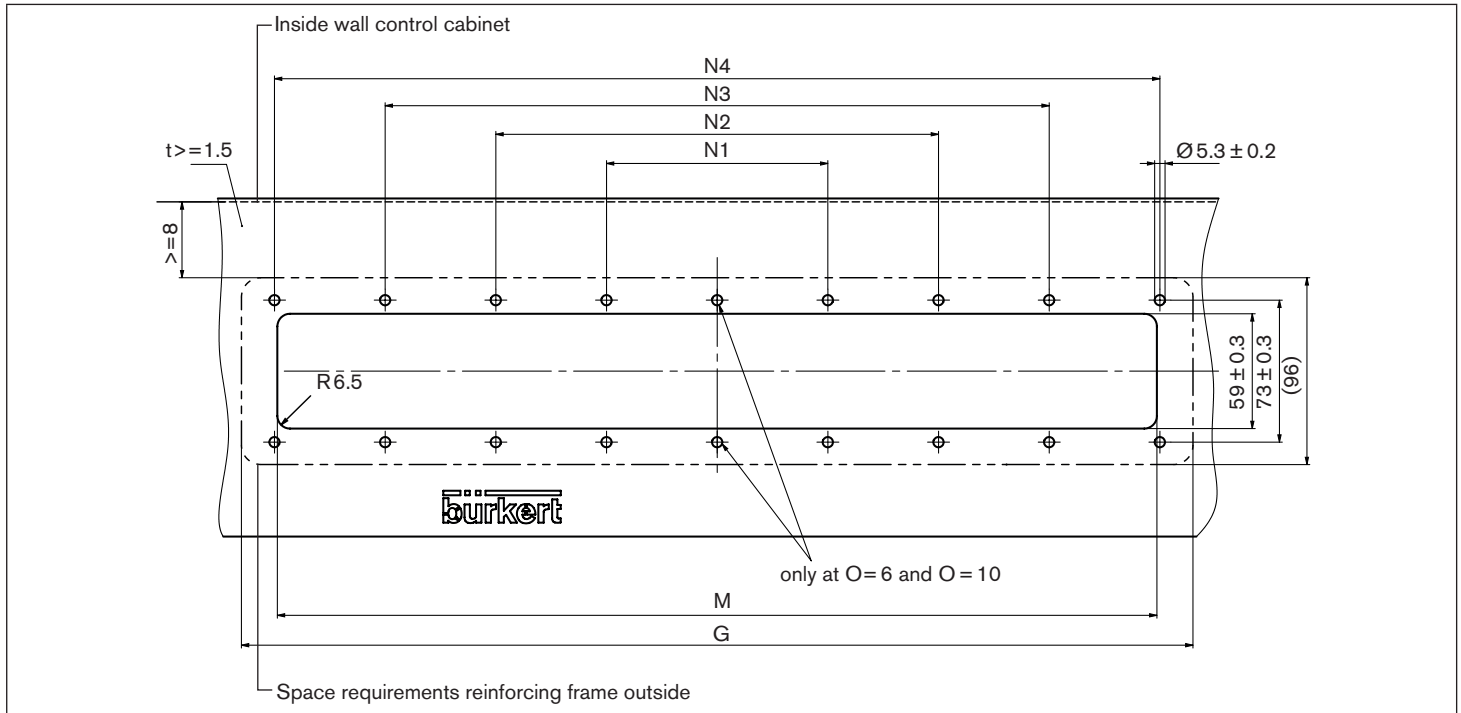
Dimensions of the flange images for AirLINE Quick – for dimensions see ["Tab. 1", page 12](#)
